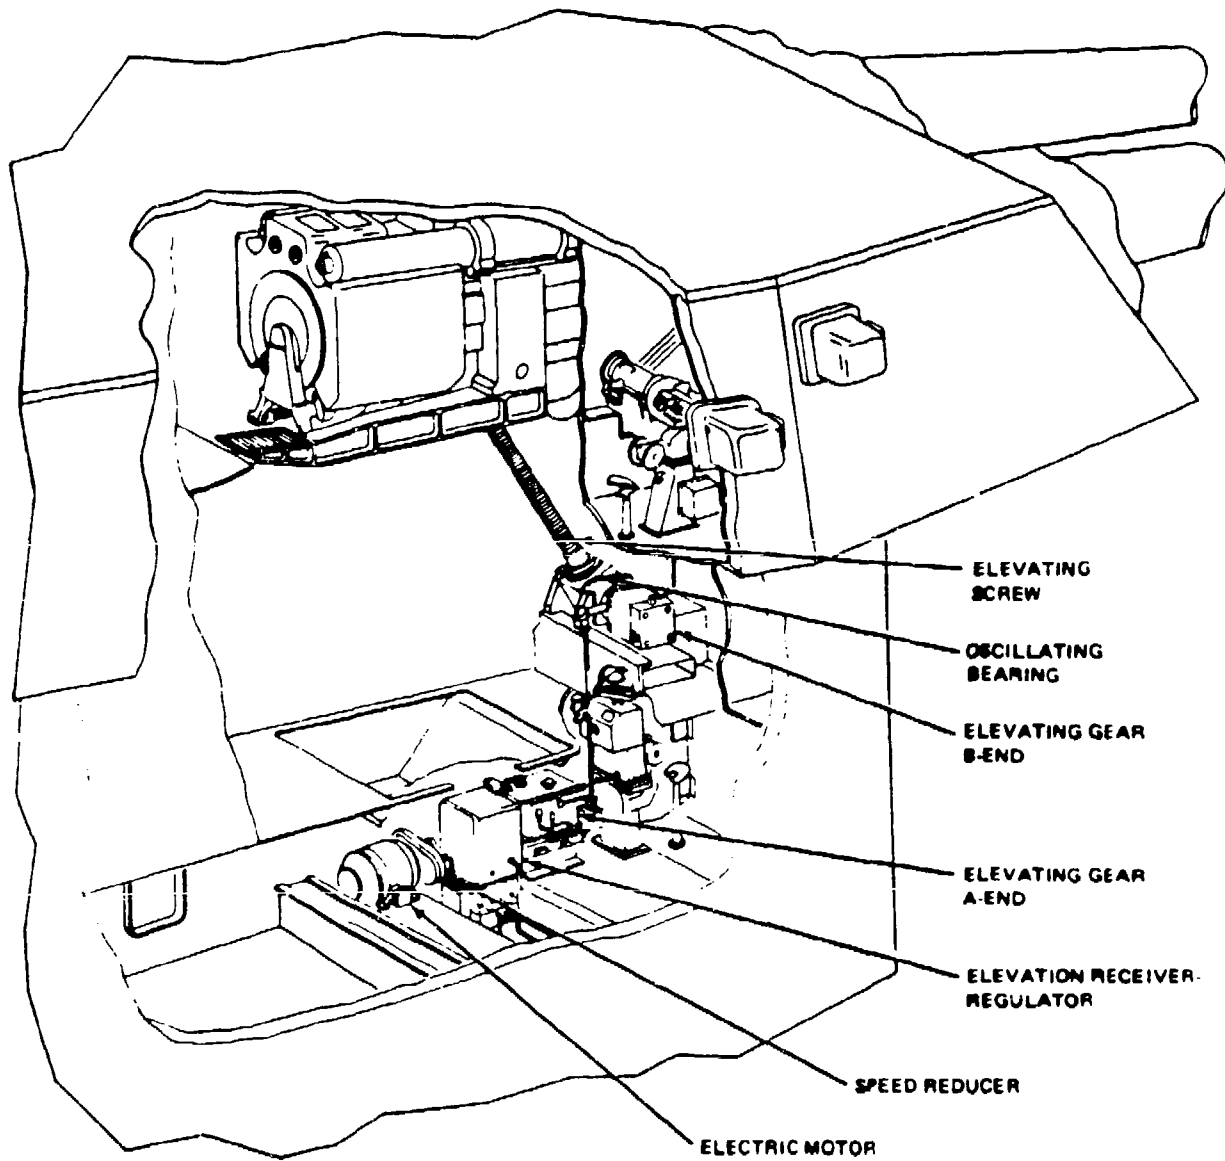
16-Inch Elevating Gear Mk 5 Mod 0, General Arrangement.
